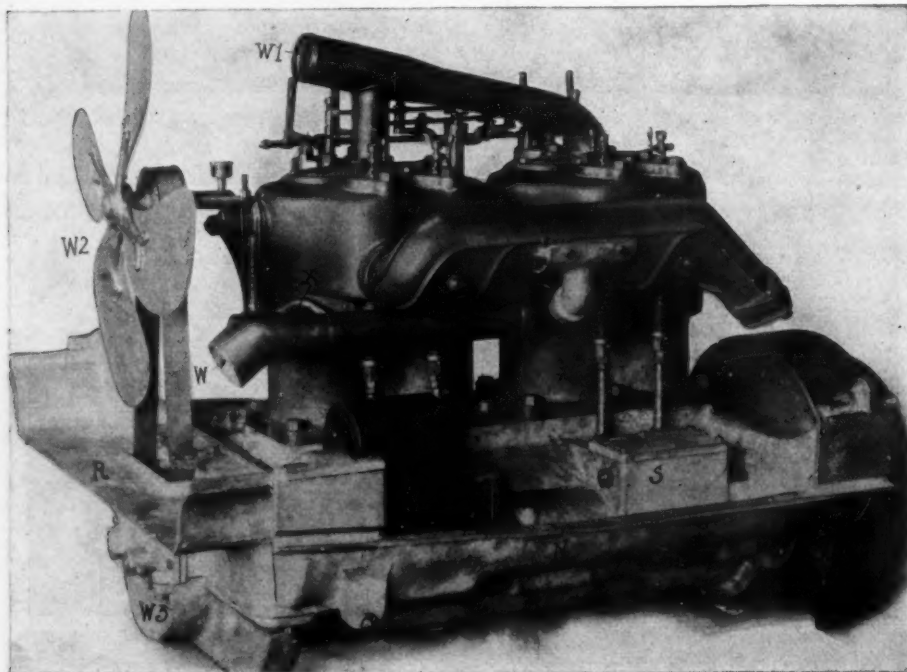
GAETH MOTOR SHOWING THERMO-SYPHON COOLING MEANS
